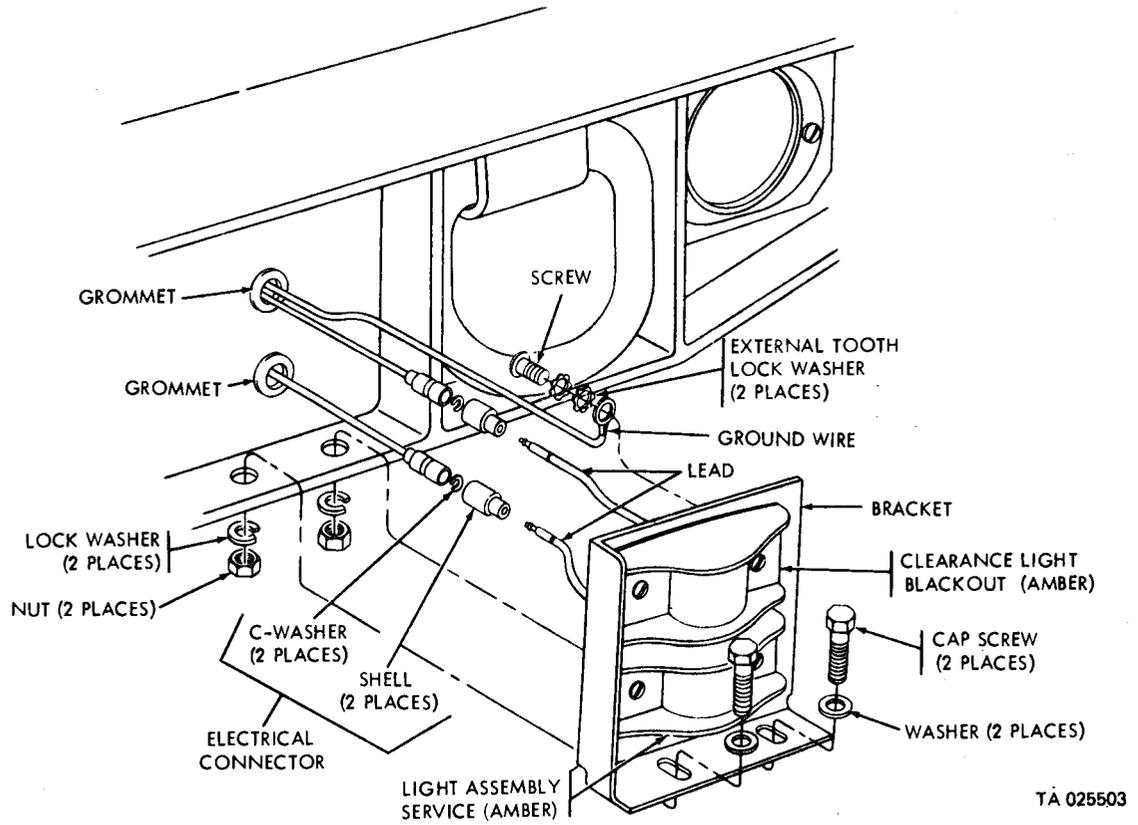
Stationary clearance light assembly (semitrailer No. 1 through 200 ).
